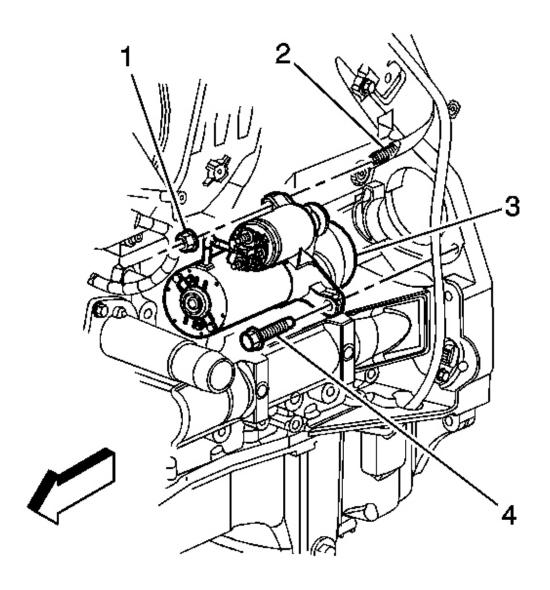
View Of Starter Motor Courtesy of GENERAL MOTORS CORP.
